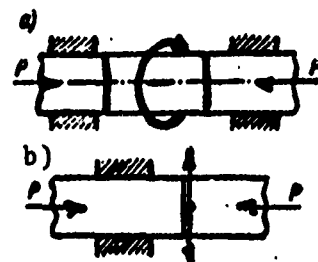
Possible schemes of friction welding: a - welding of two stationary pieces by rotating a third between them, b - vibro-friction welding (Relative reciprocating motion in the plane of the butt with relatively small amplitude at sonic frequency).
